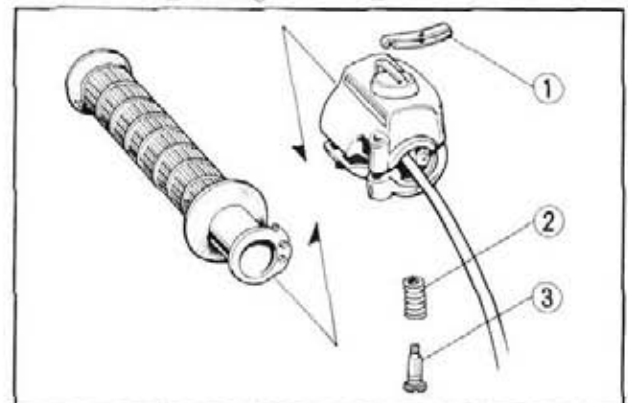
① Throttle grip adjuster ② Spring ③ Adjusting bolt
